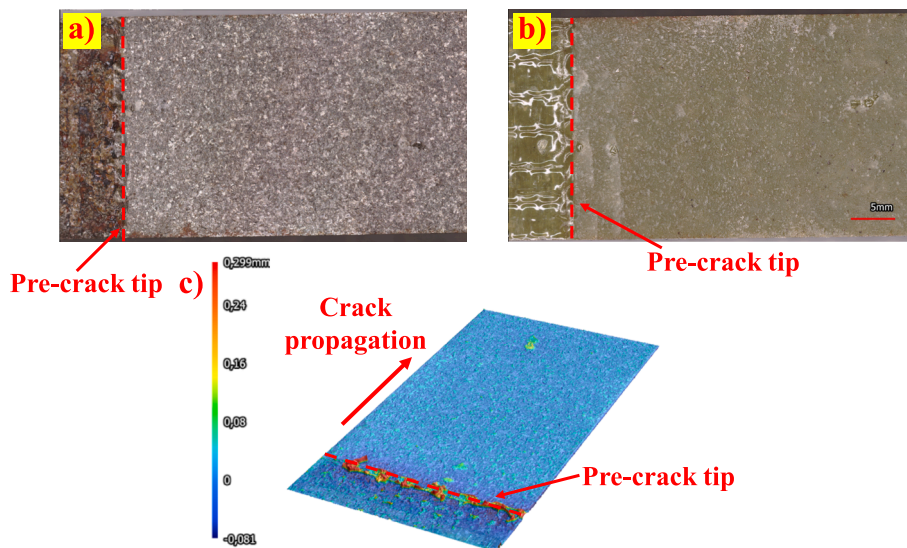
Fracture surface morphology of specimen 3ENF-CU-S5: a) image of the fracture surface on the steel adherend; b) image of the fracture surface on the composite adherends; c) 3D scan of the fracture surface on the steel adherend.
